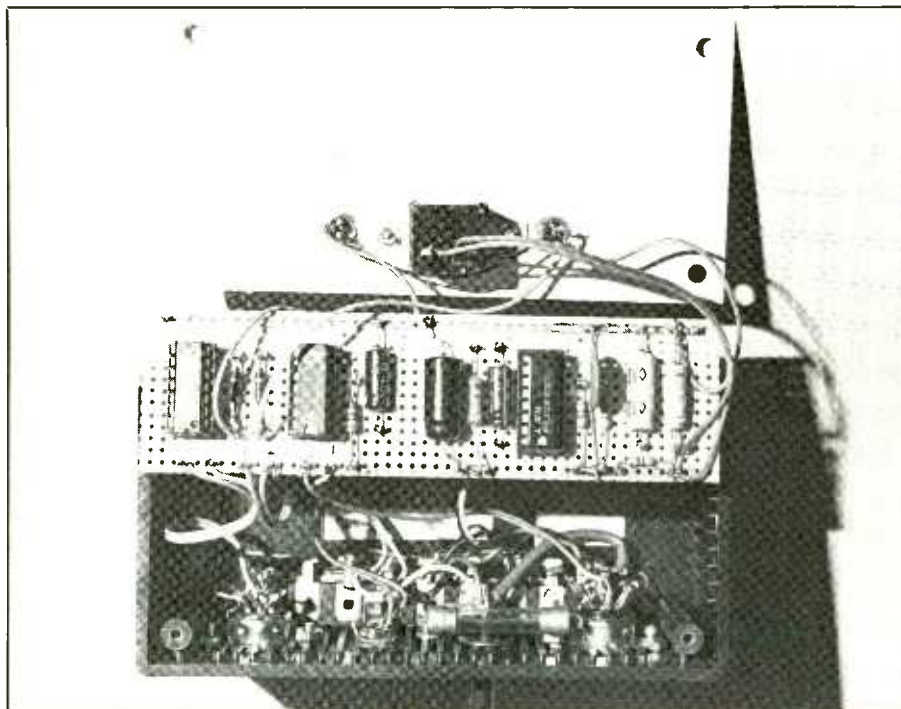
Interior view of assembled project shows circuit-board assembly held in place by molded retainers in enclosure.
